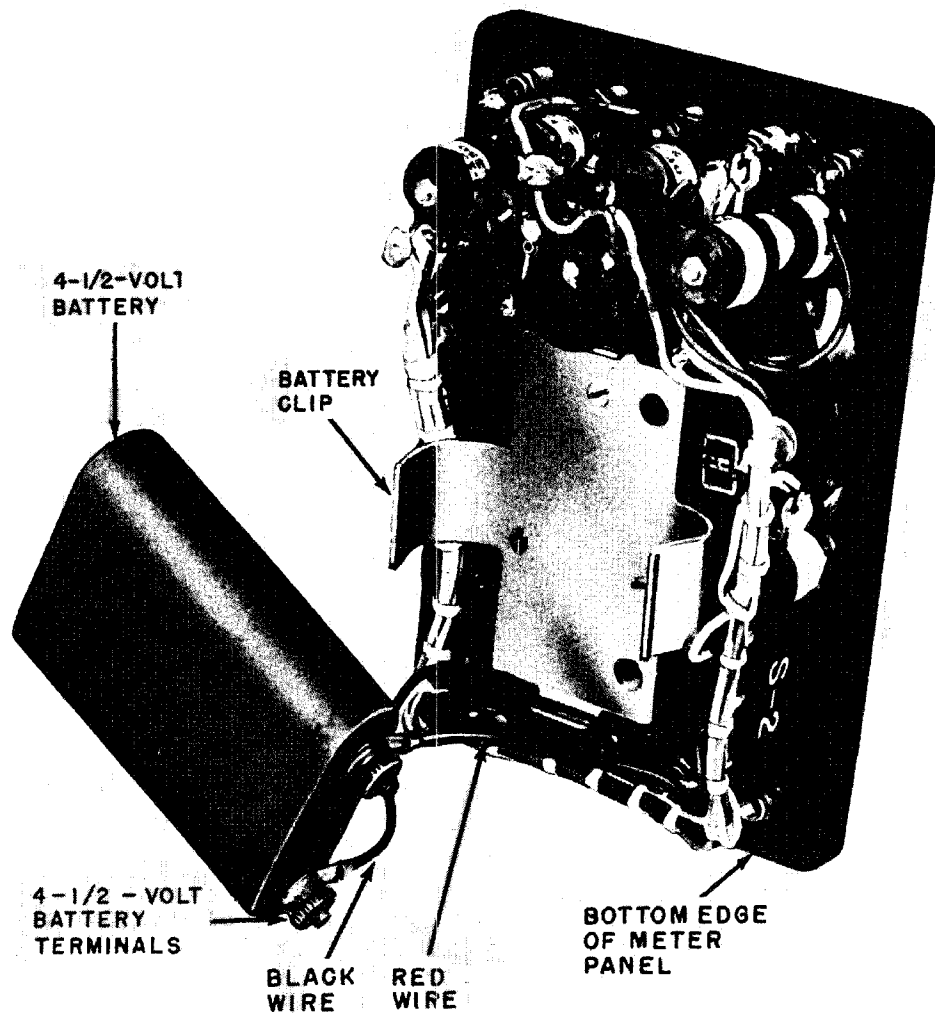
Test Set TS-26/TSM, meter panel assembly, rear view.
